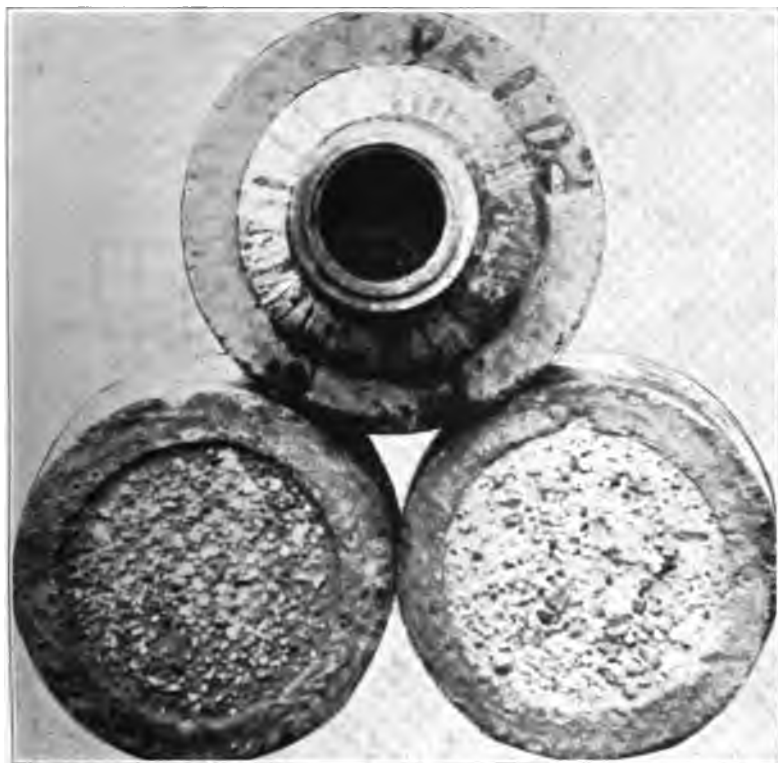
APPEARANCE OF SURFACES OF PU SPECIMENS
